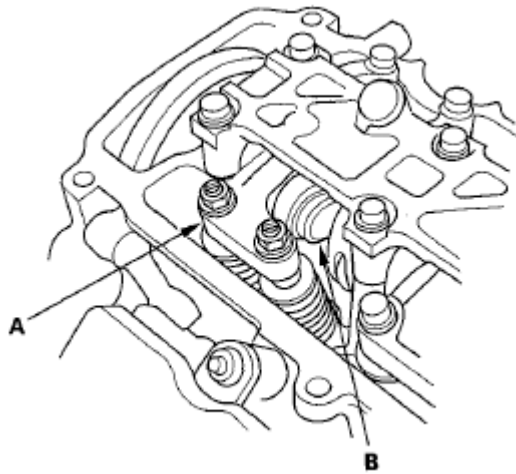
Inserting Feeler Gauge Between Adjusting Screw And Valve Stem
